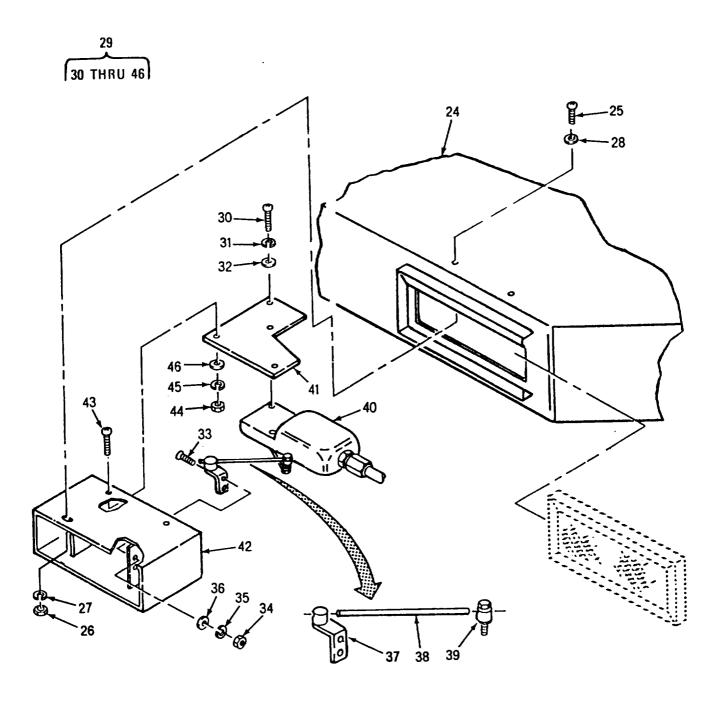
ECU Intake Damper Doors (Sheet 2 of 2)
